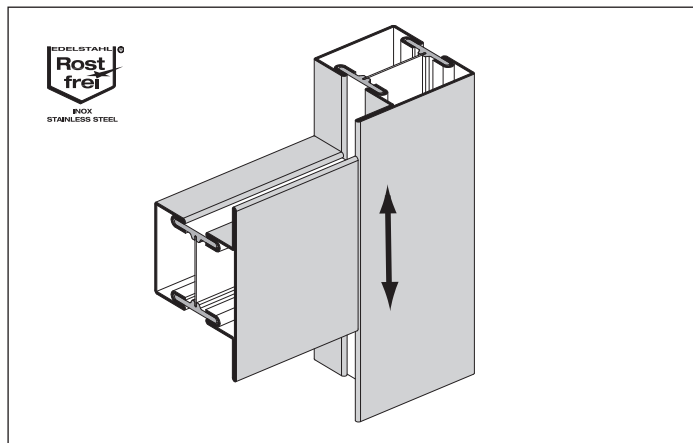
Weld the T-joint from the centre to the outside
